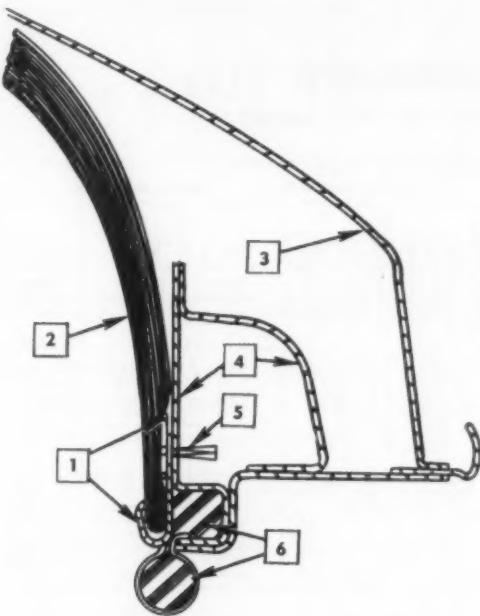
Cross-sectional view of headlining (Rambler) fastened to side roof rail: 1 — J molding, 2 — headlining, 3 — roof panel, 4 — side roof rail, 5 — J molding retaining clip and 6 — storm strip.
